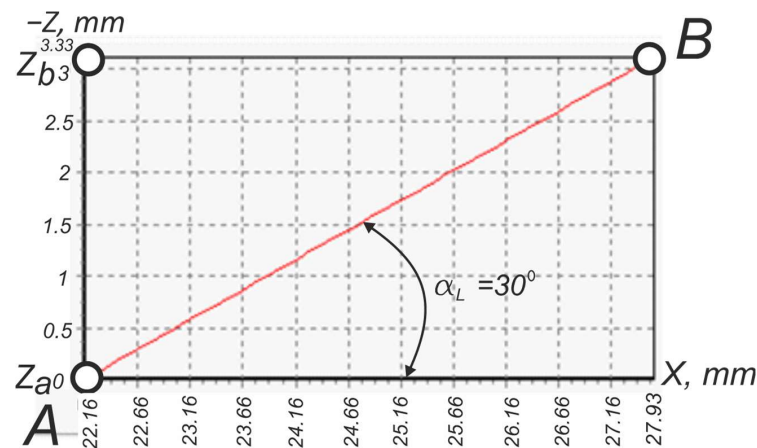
Visual software model of the flank profile AB of the drill-string tool-joint thread NC23.
